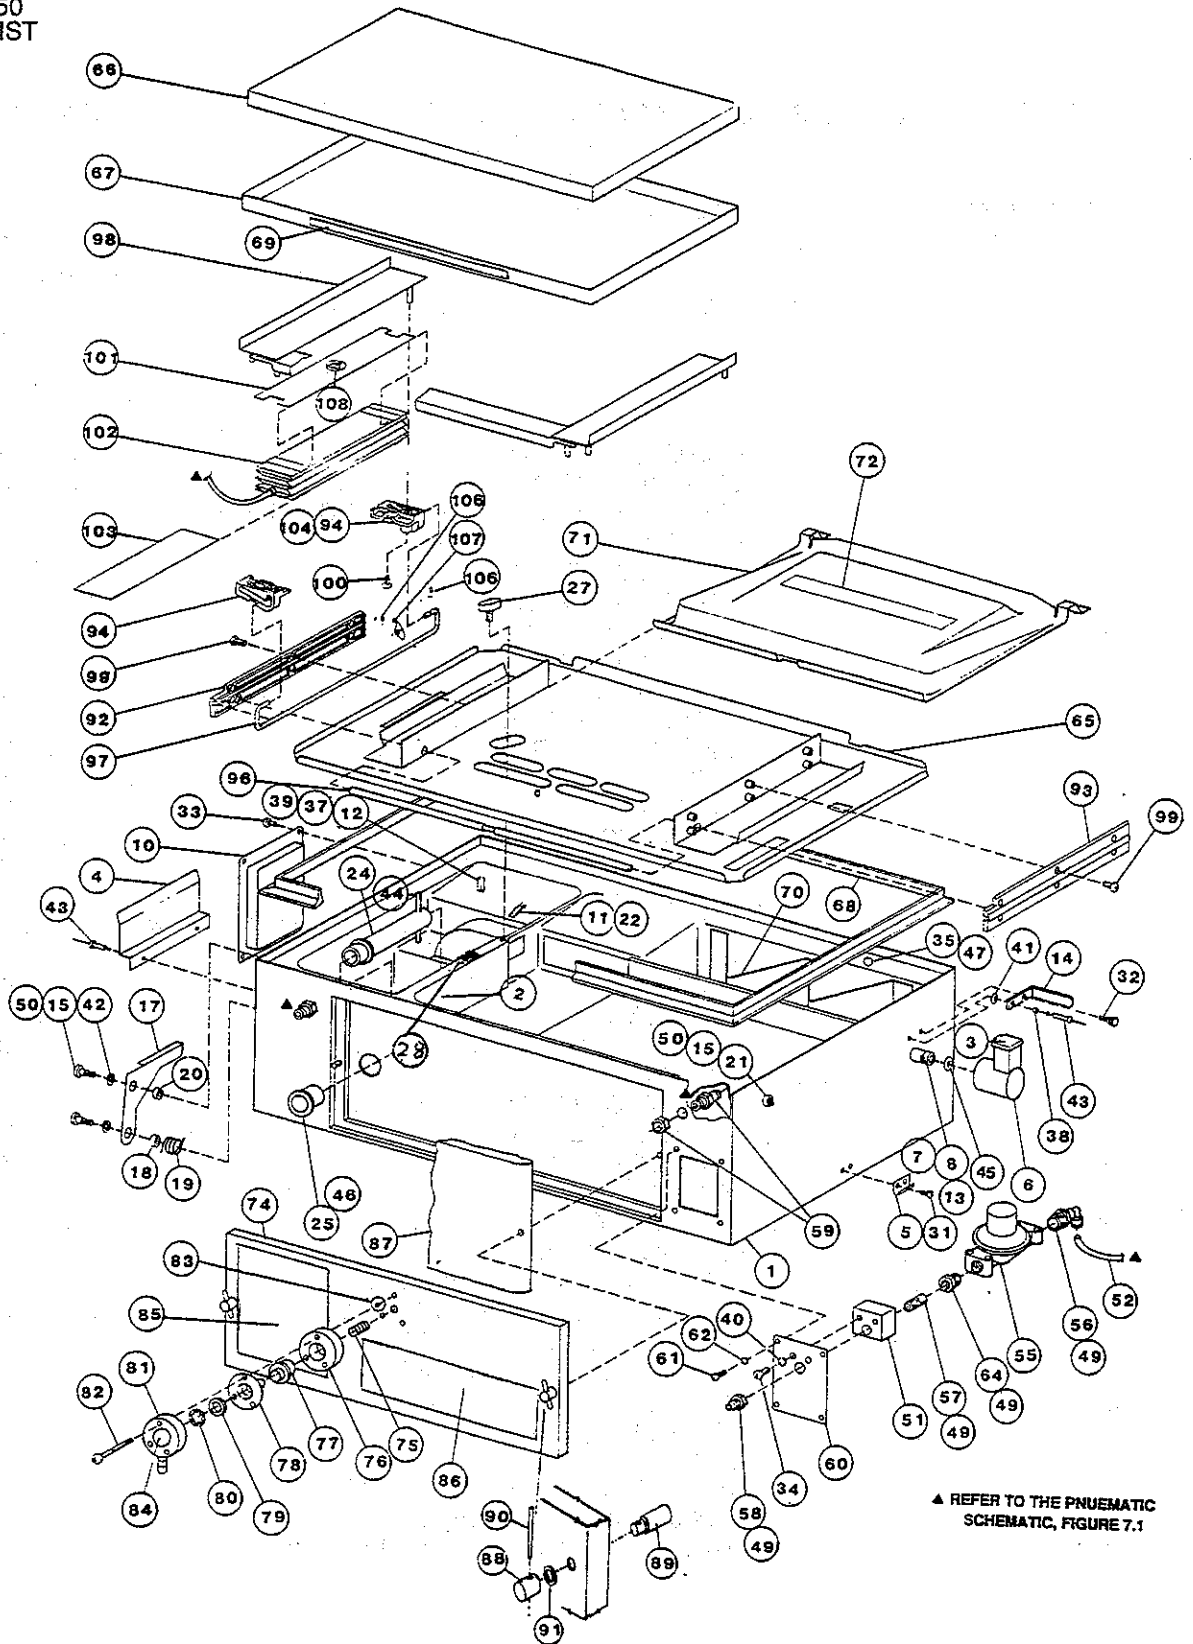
PARTS LOCATION DIAGRAM, SHELL AND PNEUMATIC TILT DECK ASSEMBLY
